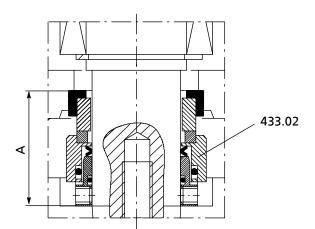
Sectional drawing of mechanical seal with covered springs (HJ)
